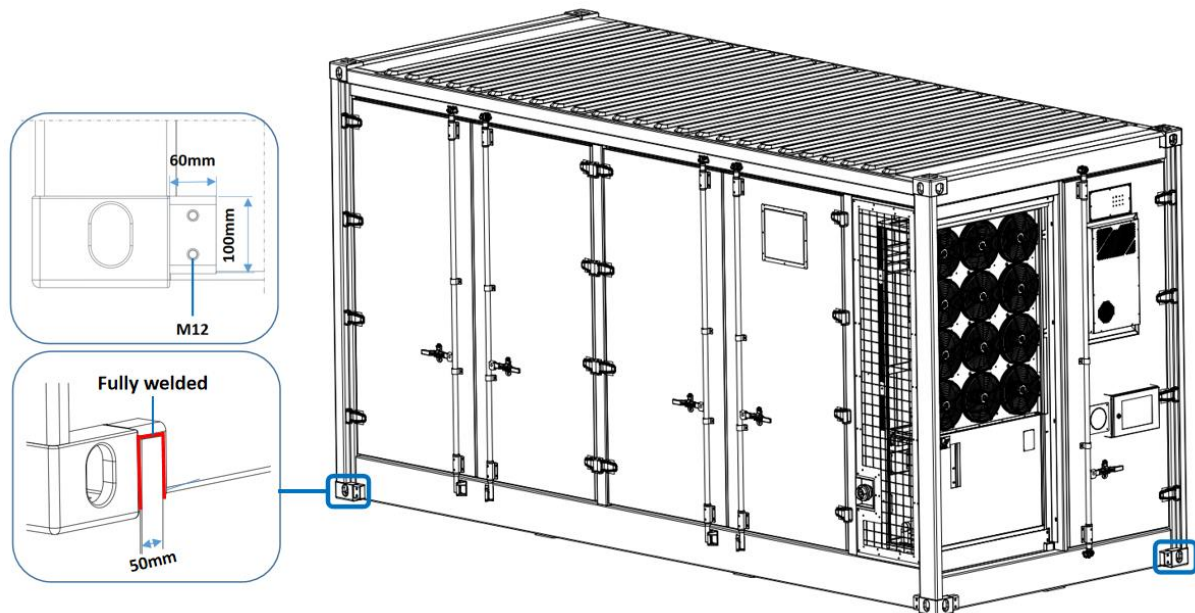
Welding of Container Grounding Flat Steel
